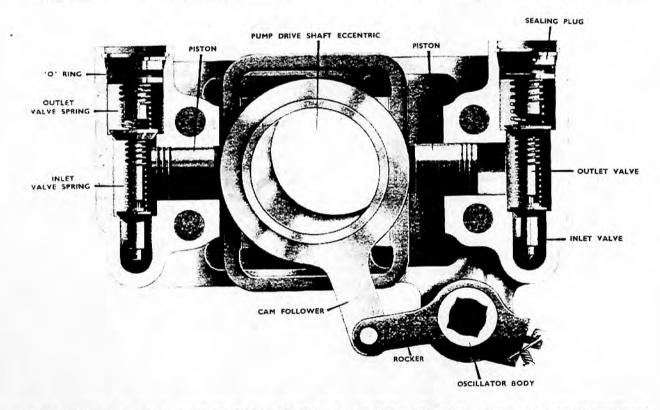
SECTION THROUGH PUMP TO SHOW CONTROL VALVE OSCILLATING MECHANISM AND VALVE CHAMBERS
